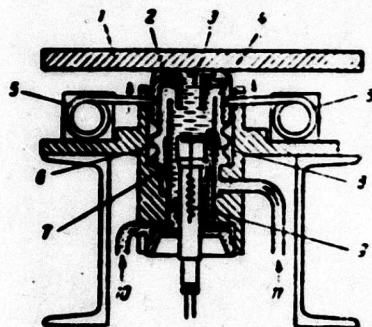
Searching head with flow-through (jet) contact (Lehfeldt, FRG) for control of sheets: 1 - controlled sheet; 2 - ring; 3, 4 - water; 5 - spring; 6 - bellows; 7 - directing tube; 8 - piezoelement; 9 - inductance coil; 10 - water supply for purification; 11 - water supply for contact.
